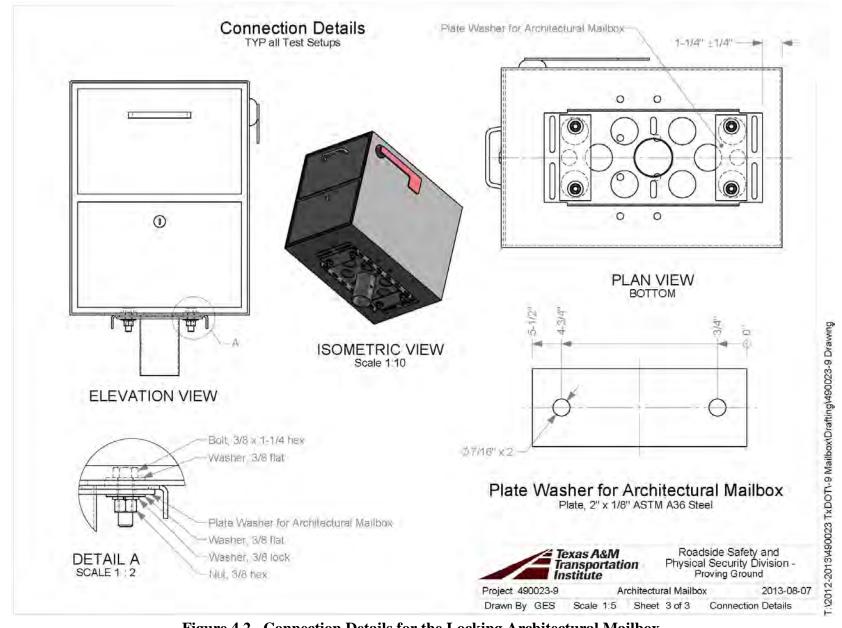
Connection Details for the Locking Architectural Mailbox.
